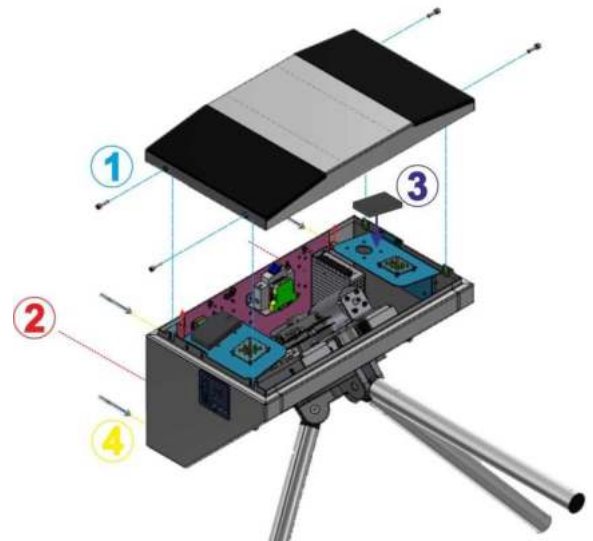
General view of the "SKULL-M" tripod turnstile assembly
